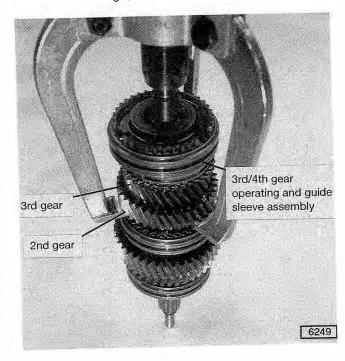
3rd gear cluster and 2nd gear being removed from output shaft of Getrag 260 transmission.
